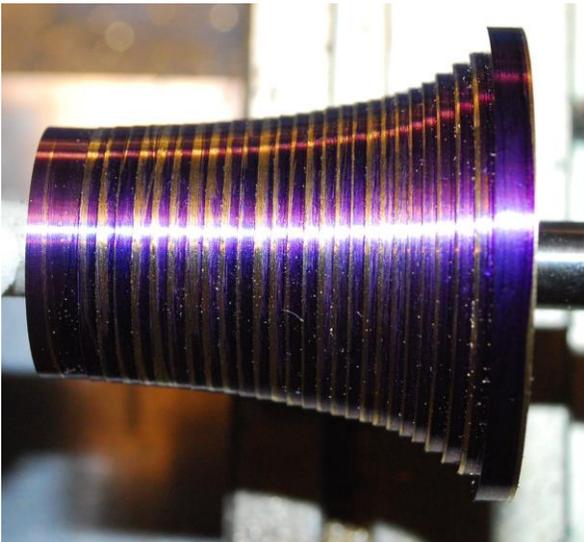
Coated with layout dye and partially filed. Continue filing until all of the dye is removed except for the far right side that serves as a shroud for the click mechanism and will not be grooved.
